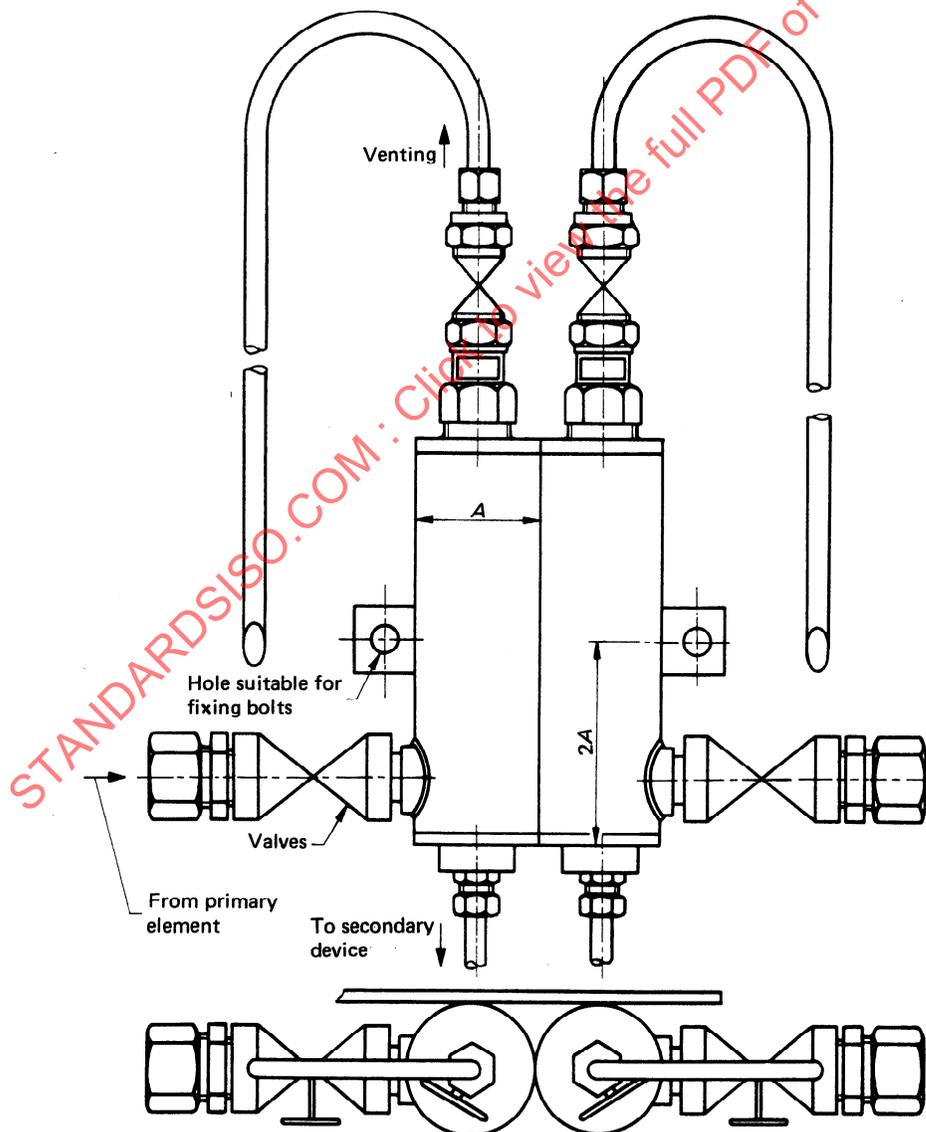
Arrangement of wall mounted gas collecting chambers and valves
